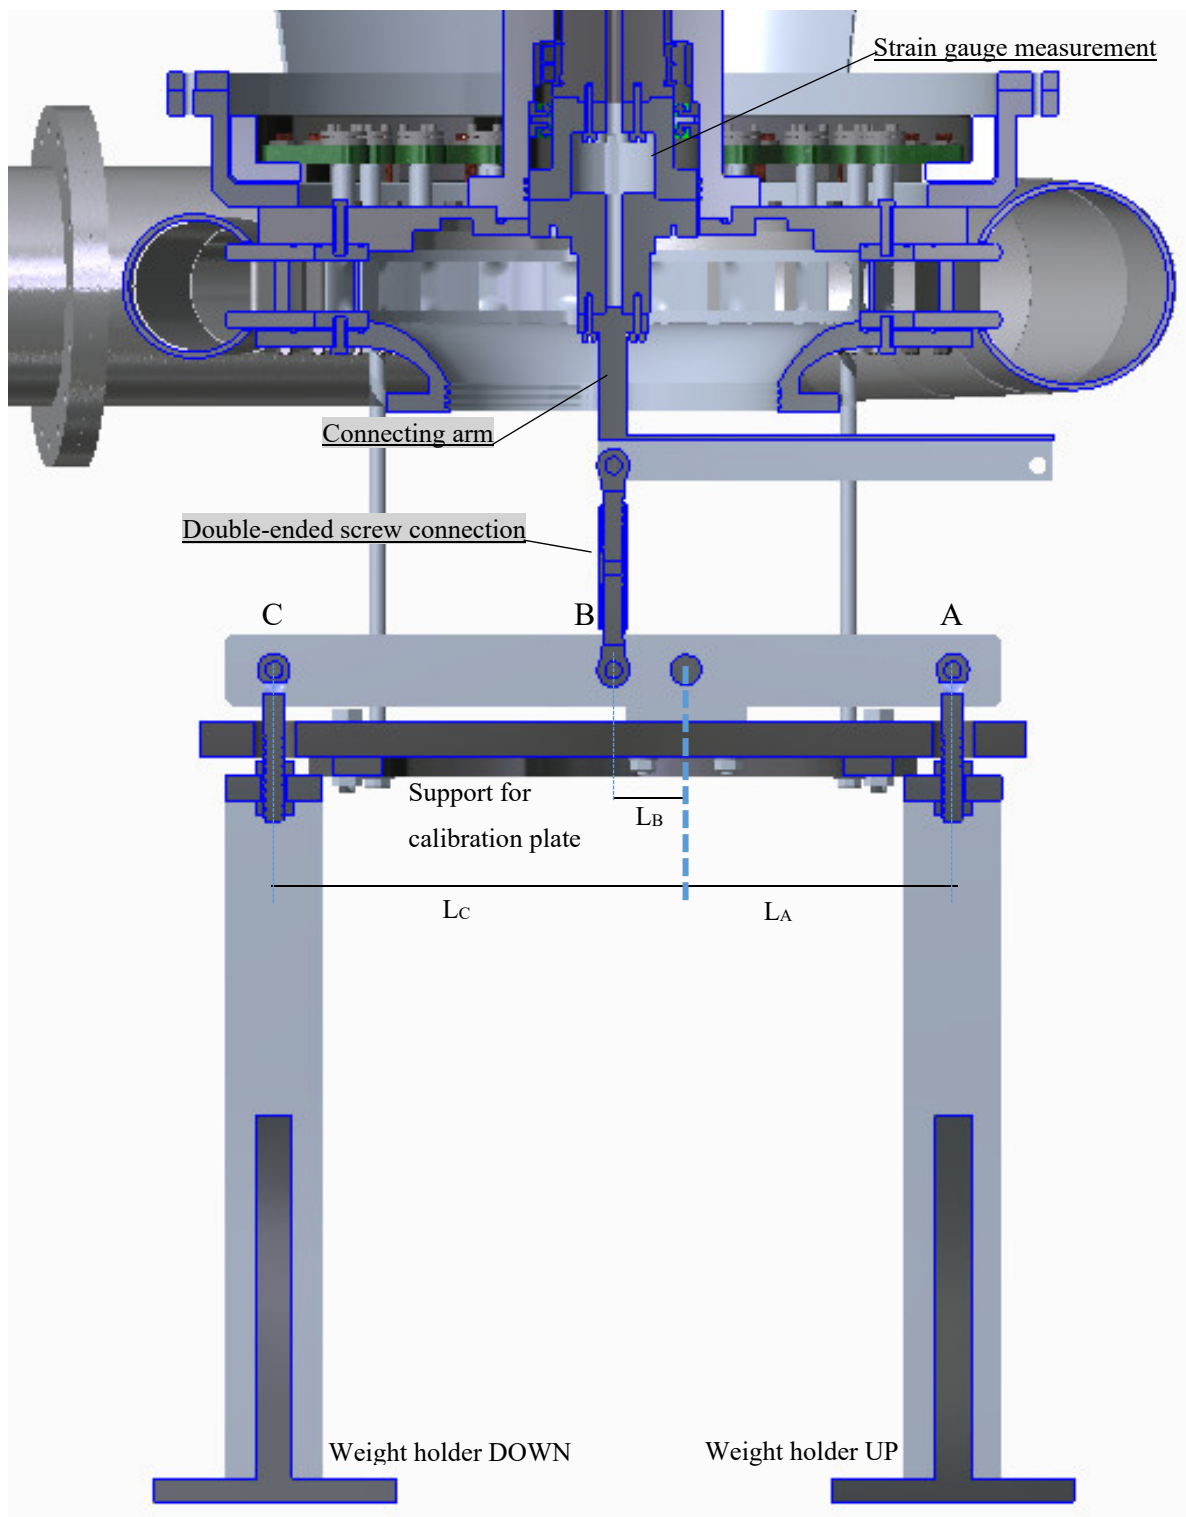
TTL Jig for Axial Load Calibration; Cross-sectional View
